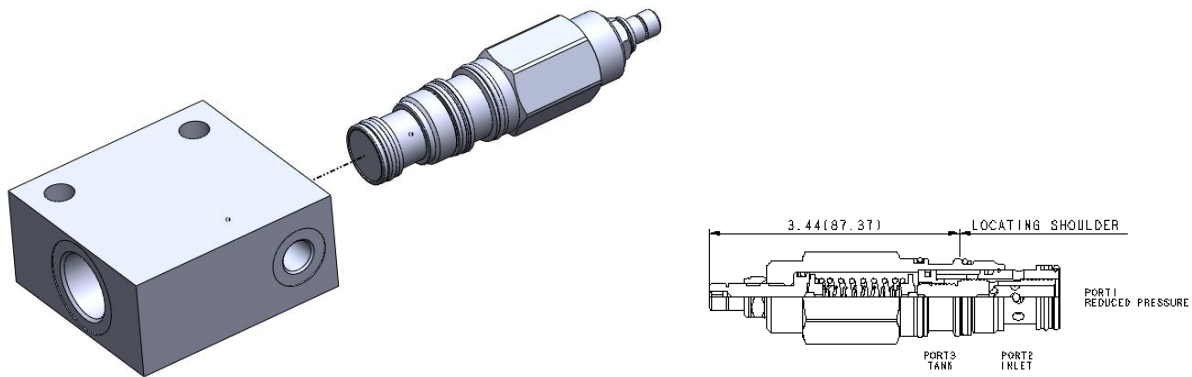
Sun Hydraulic PRFR pressure reducing valve and BCD manifold.
